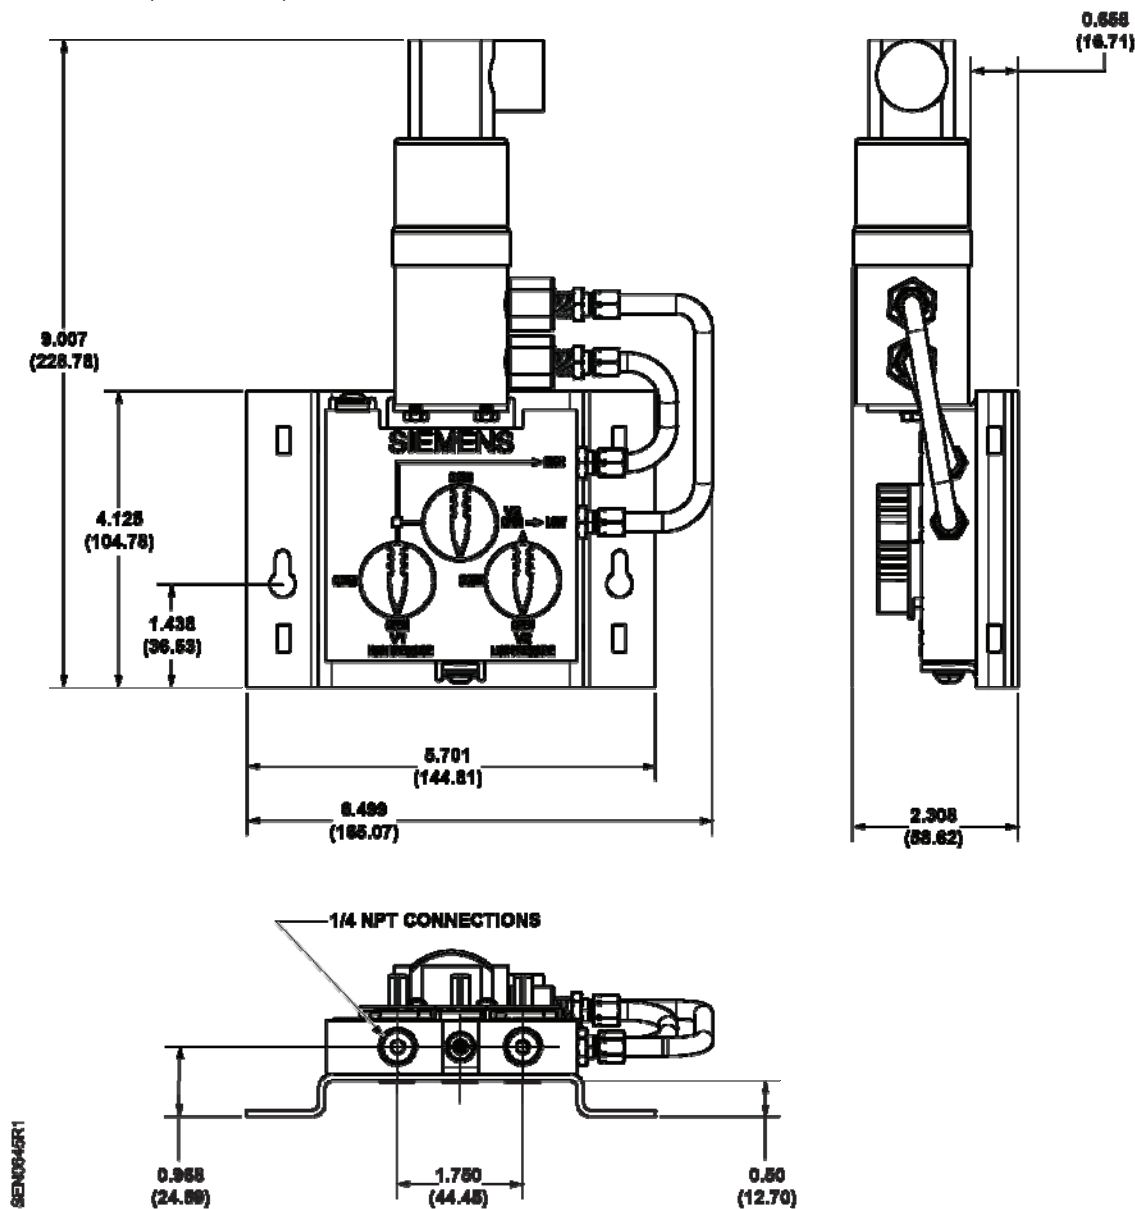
Differential Pressure Sensor with Manifold Dimensions.
